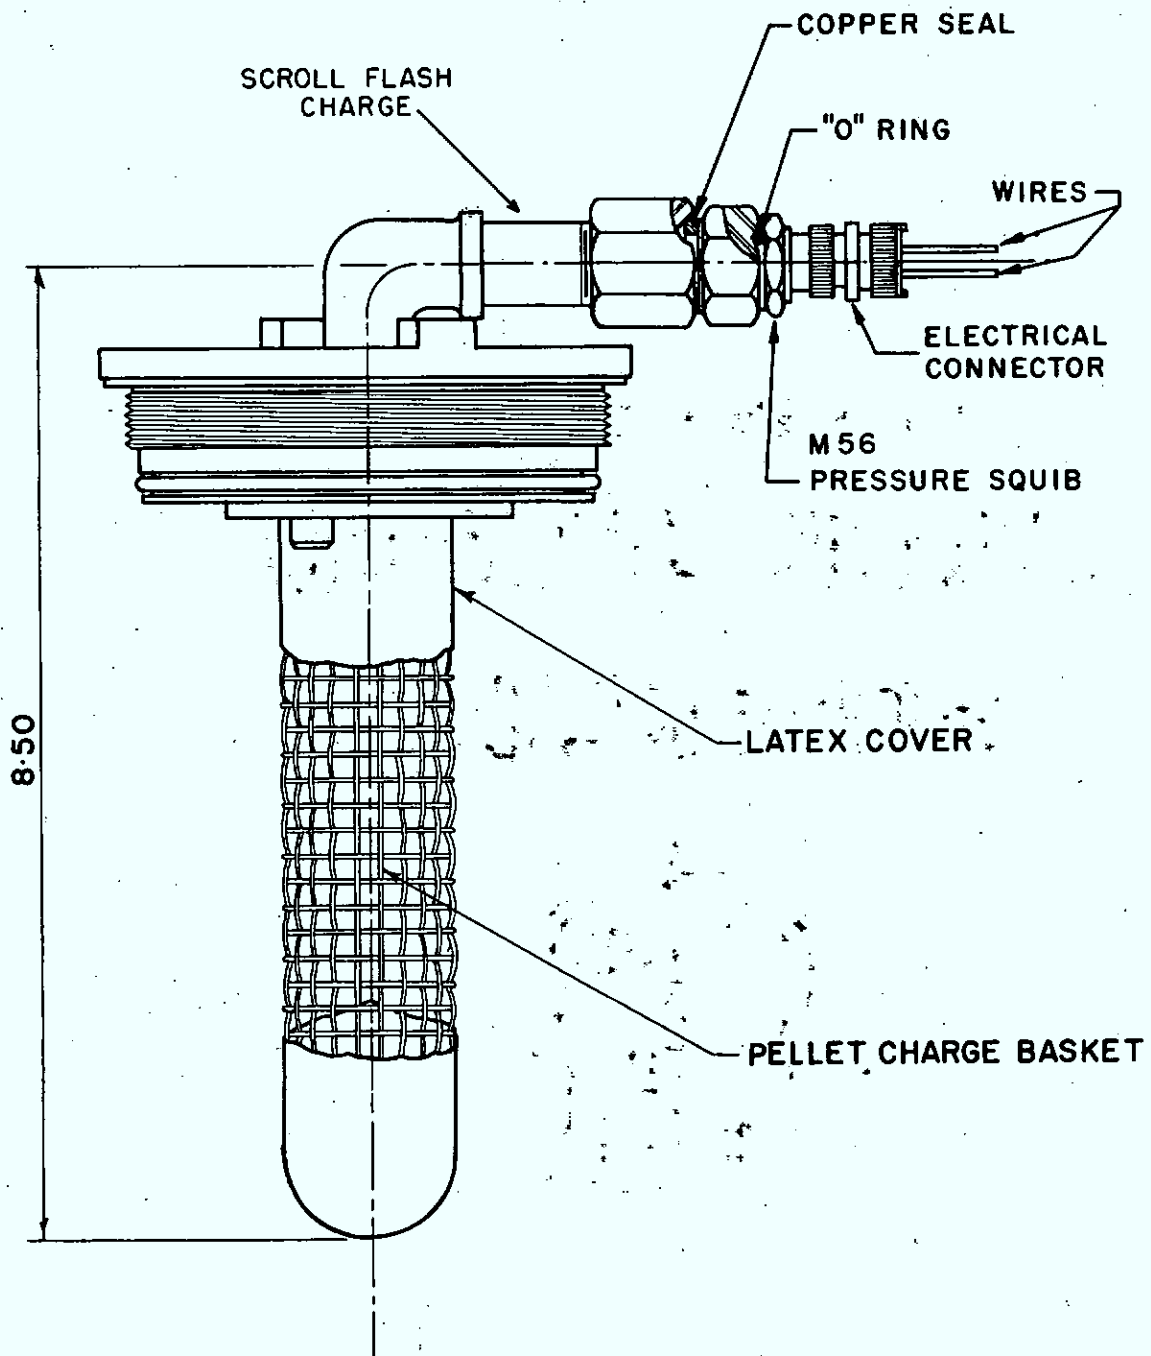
Schematic of 9KS11000 Rocket Motor Igniter
